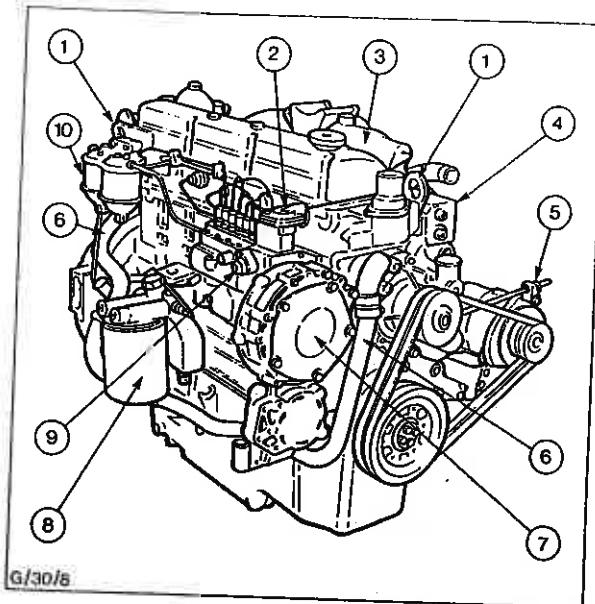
6 Cylinder Intercooled Marine Engine
